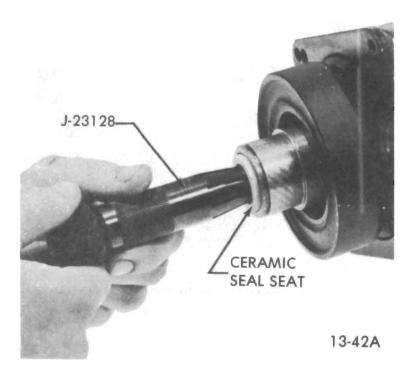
Removing or Installing Ceramic Shaft Seal Seat
